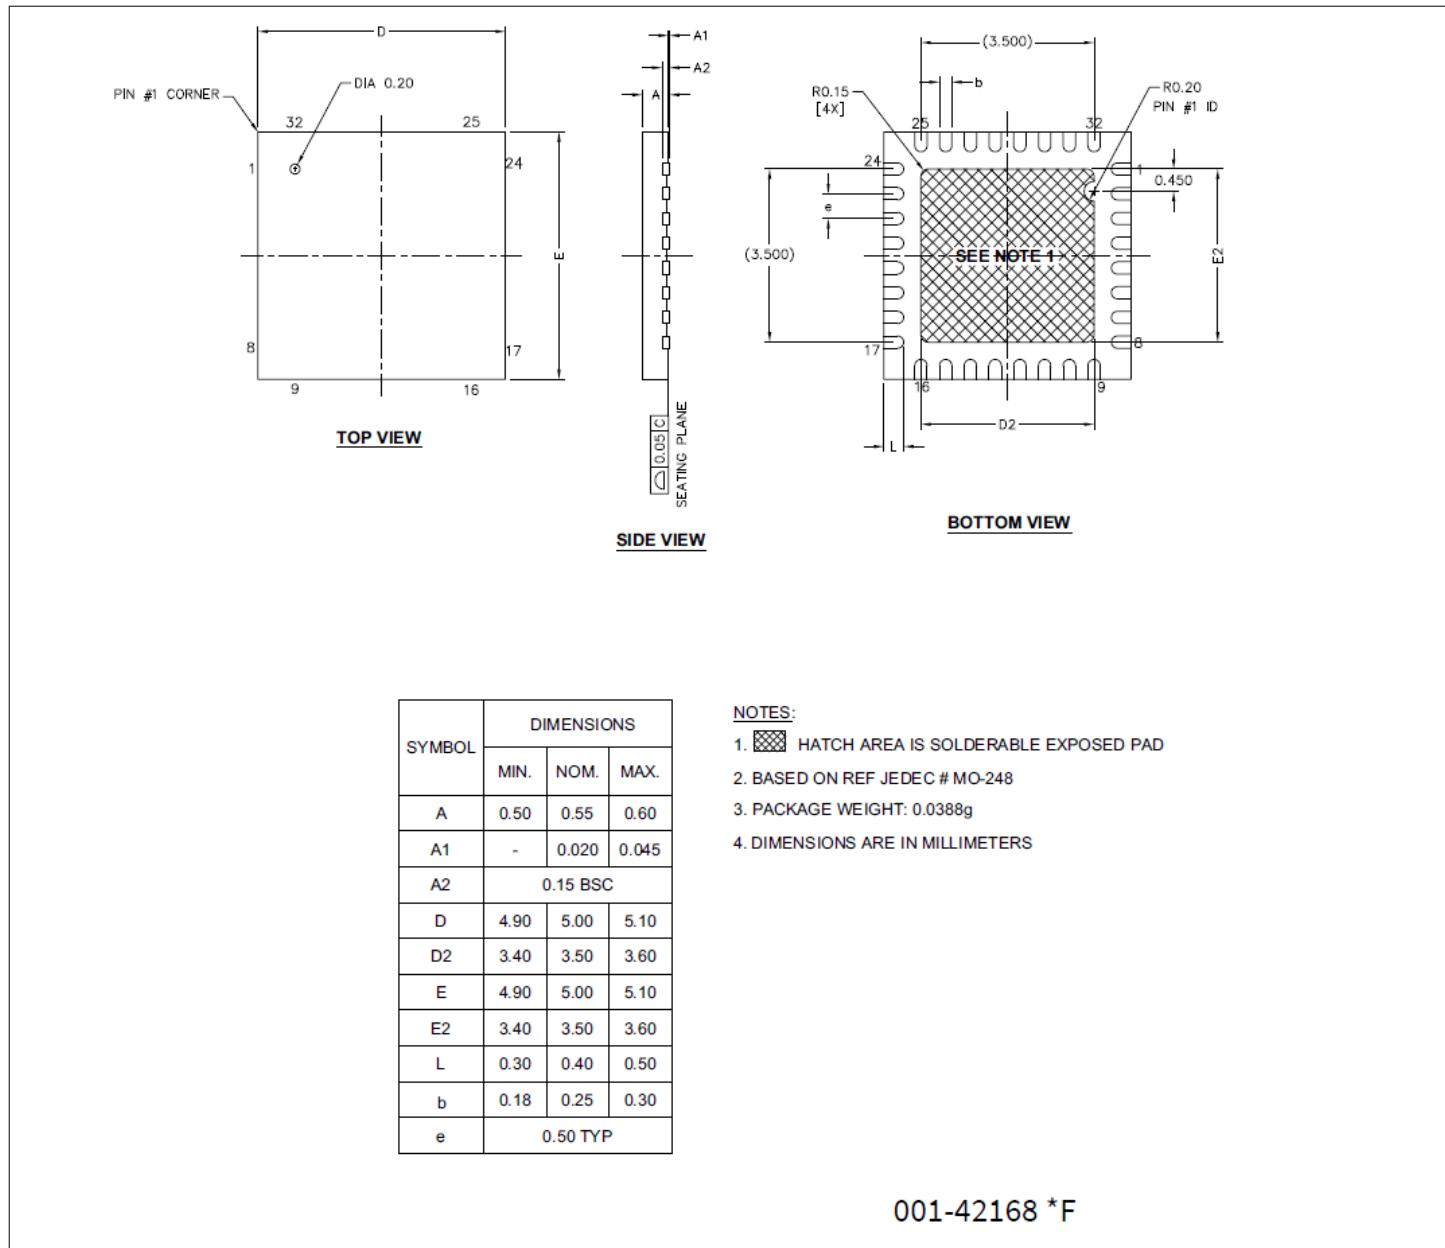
32 LEAD QFN 5.0×5.0×0.55 MM LQ32/LQ32B 3.5×3.5 MM EPAD (SAWN) package outline (PG-VQFN-32), 001-42168
